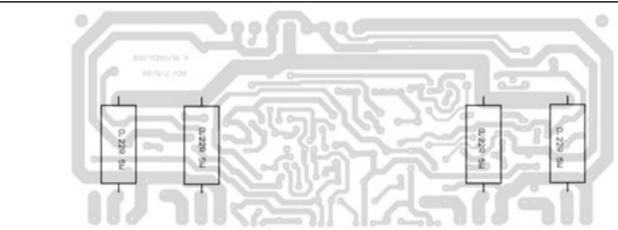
The bottom overlay for the main amplifier PCB. There is only the four resistors to mount underneath the PCB. Stand these off the PCB as they will need room to allow air flow over them. Note that the picture is viewed from underneath the PCB.
